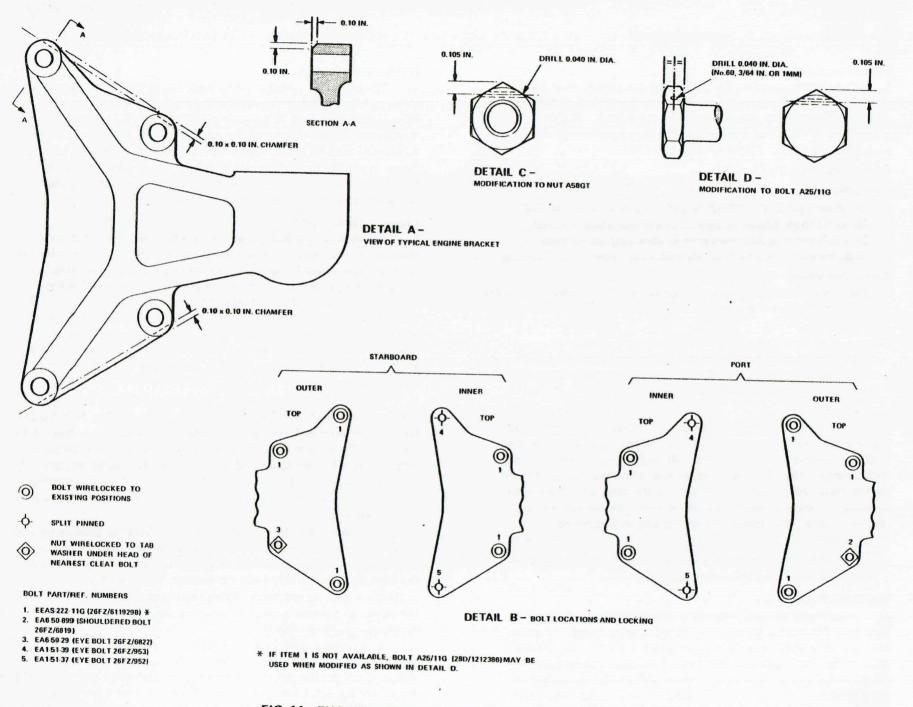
A. ENGINE FORWARD MOUNTING BRACKETS
